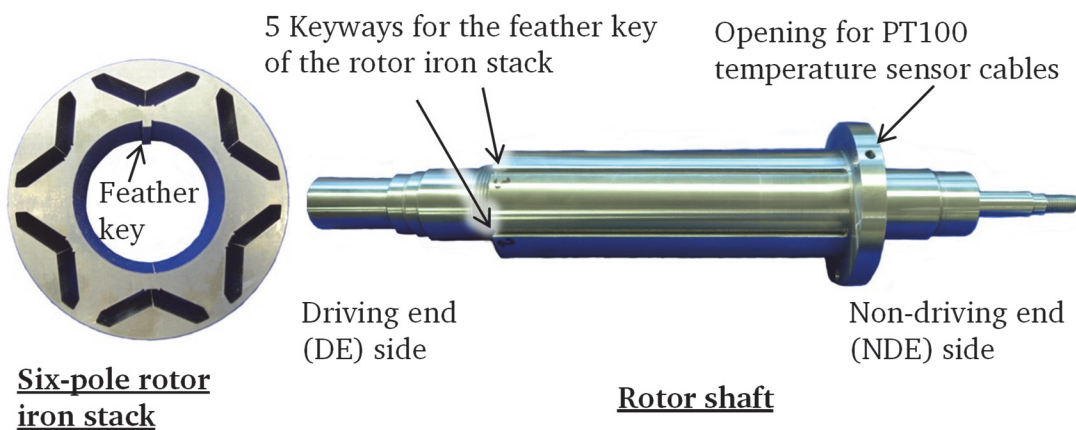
Left: One rotor section with six-pole V-shaped magnet pockets with a feather key, Right: Rotor shaft of the prototype electric machine
